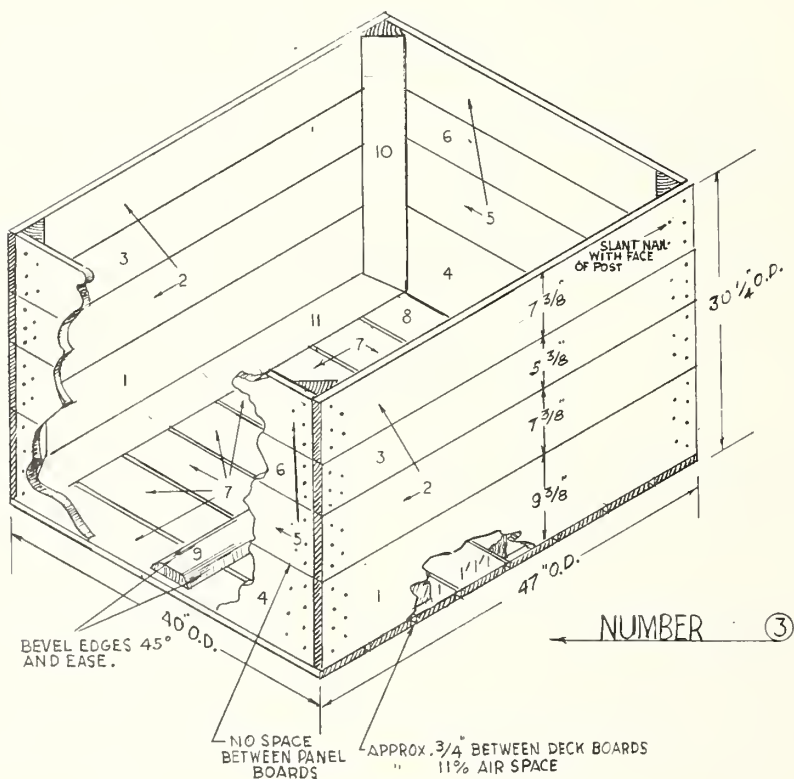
Test pallet box No. 3 with solid sides, spaced bottom, and an inside depth of 29 1/2 inches. Box does not have pallet.
